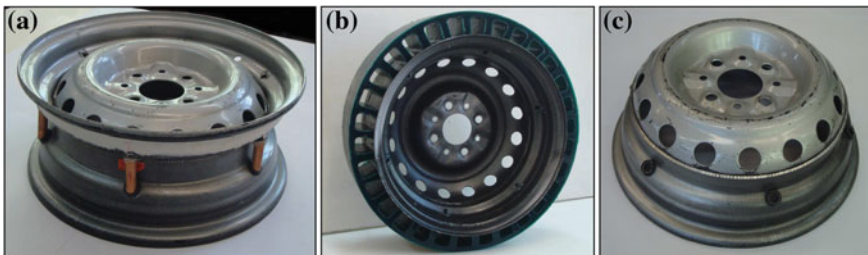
Full-scale model of a wheel with springing inner emergency element from elastic polyurethane: a standard 5JX13H2 disk wheel with a deep rim assembly; b assembled with an elastic support ring of elastic polyurethane; c wheel disk with the inner part of the detachable rim
